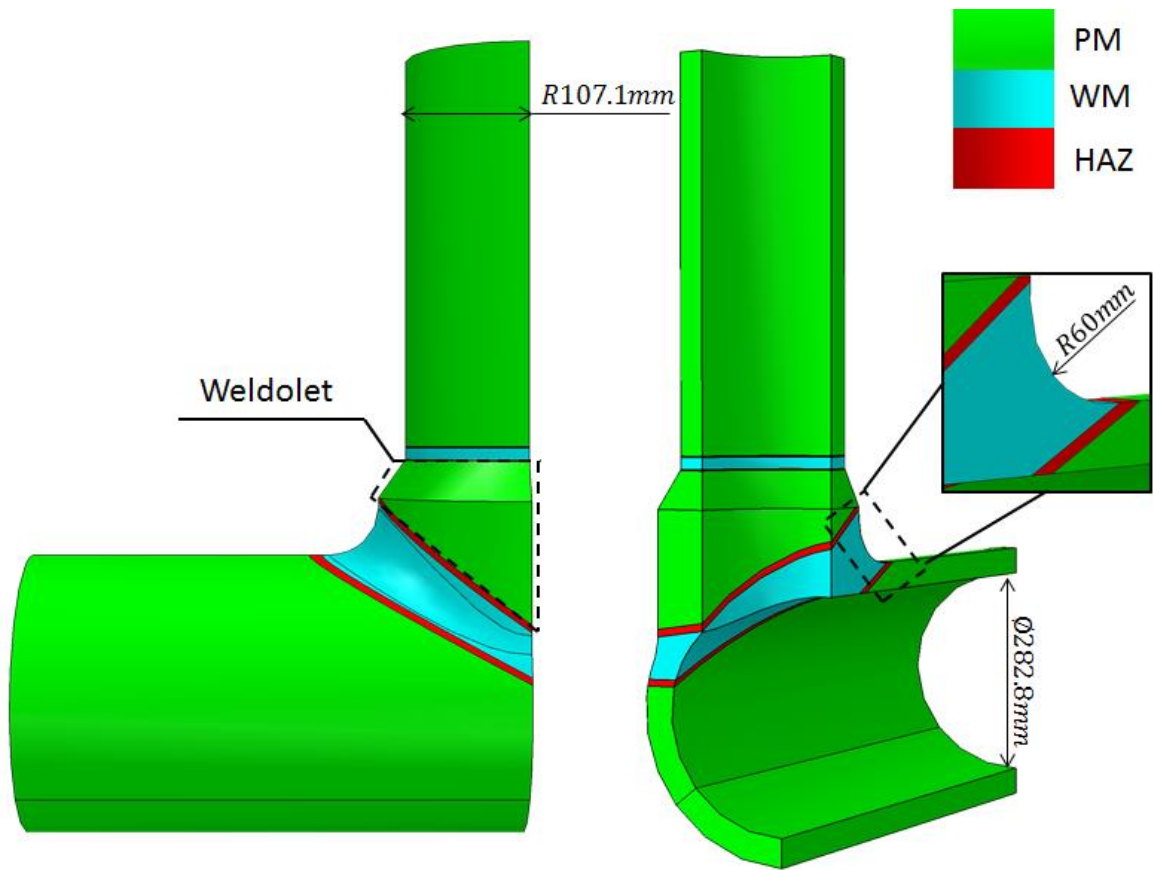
Image of the T-Joint showing the PM, WM and HAZ for branch weldolet and weldolet-header connections.
